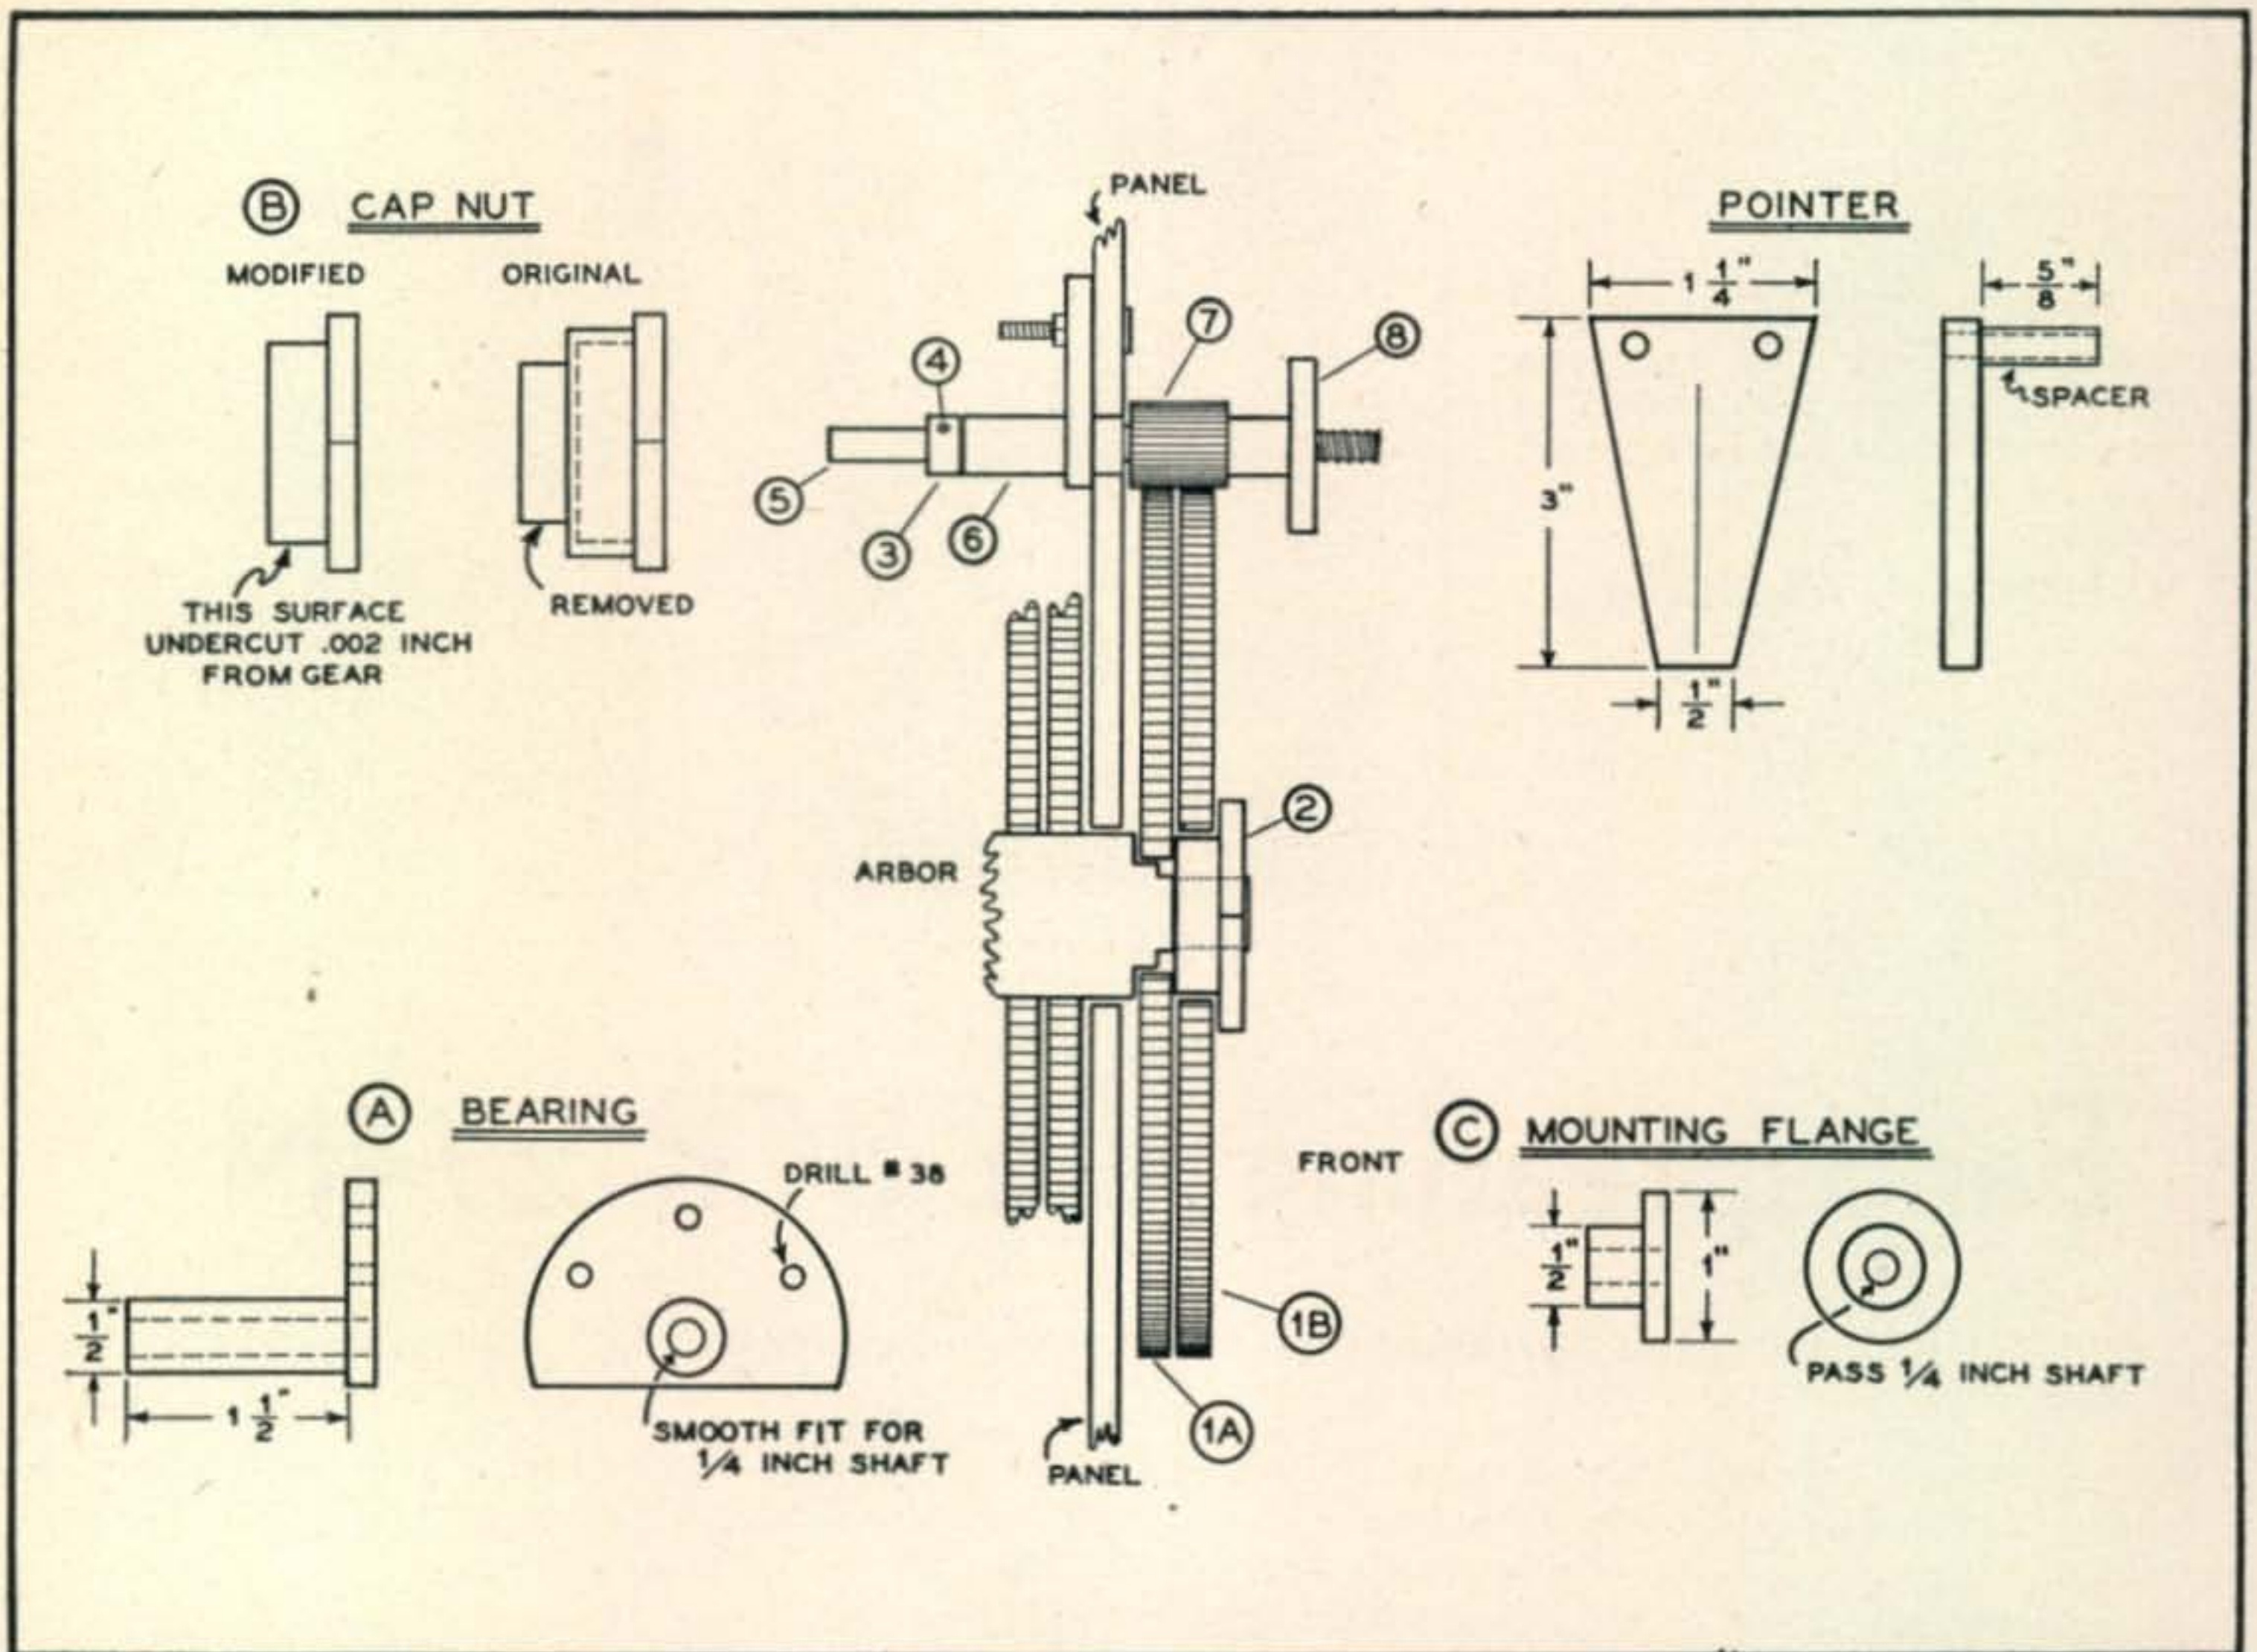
Additional parts and mounting arrangement for installing a directly calibrated bandspread dial on the BC-459A.
